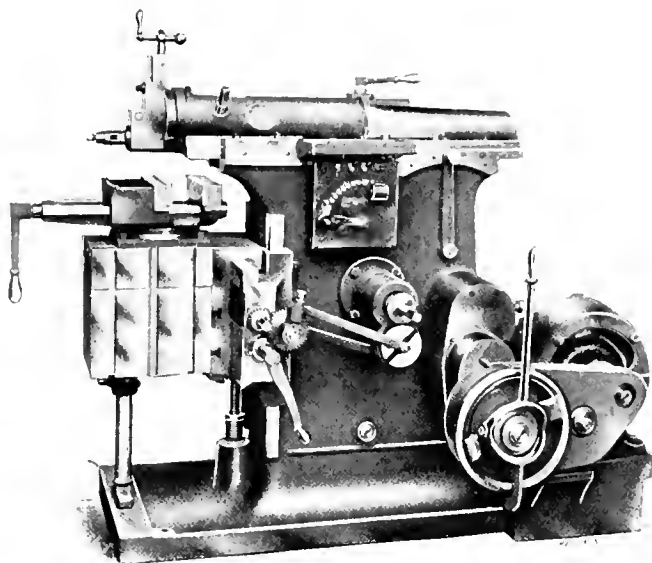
Motor-driven Geared-drive Rockford Shaper.
